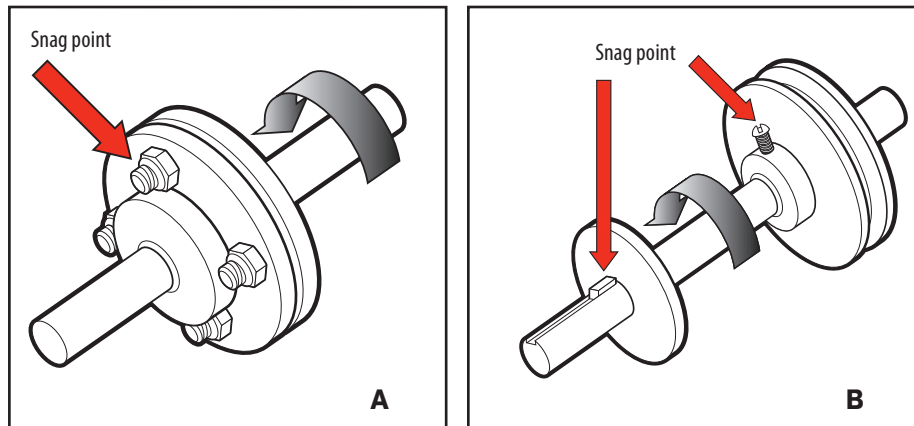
Single rotating parts presenting a snagging/entanglement hazard.
